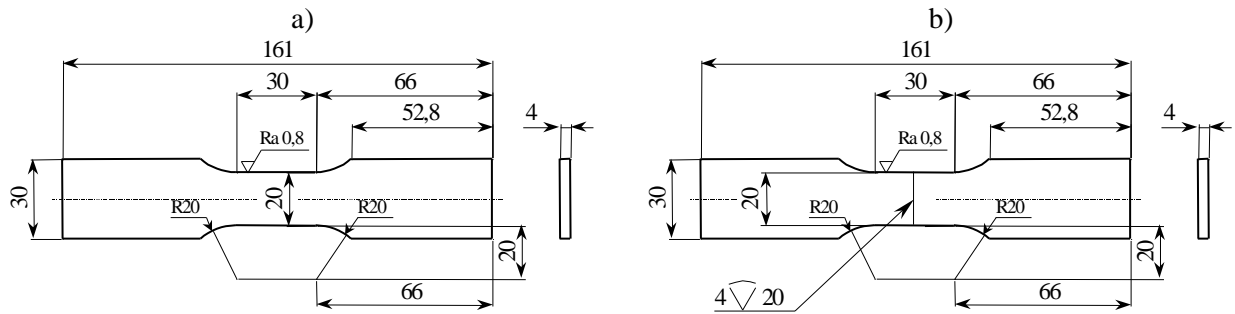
Geometric features of the sample for testing under static loads: a) AW-5754 aluminum alloy sheets; b) AW-5754 aluminum alloy welded sheets.
